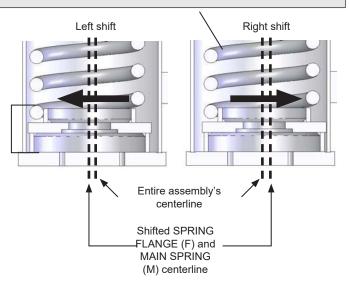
Cross-sectional views showing examples of Main Spring & Spring Flange shifting (certain components hidden for clarity)
